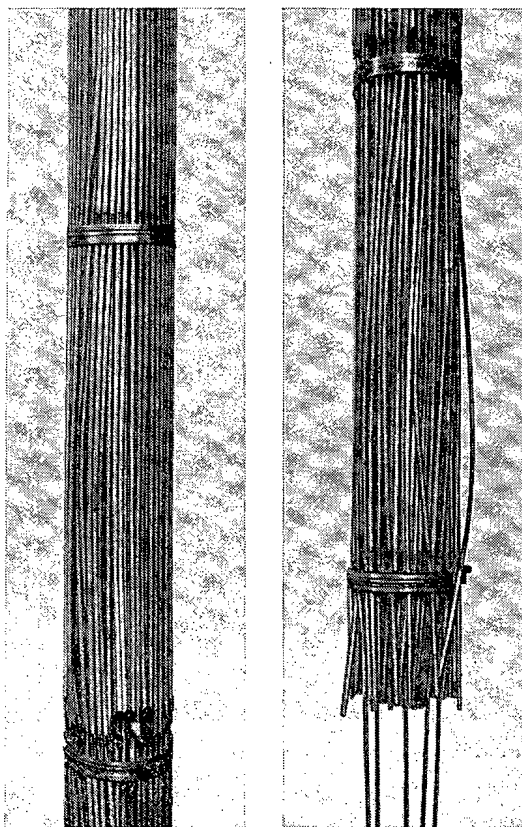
View of assembly, with spacing grids rigidly attached to the shield tube, after testing.
